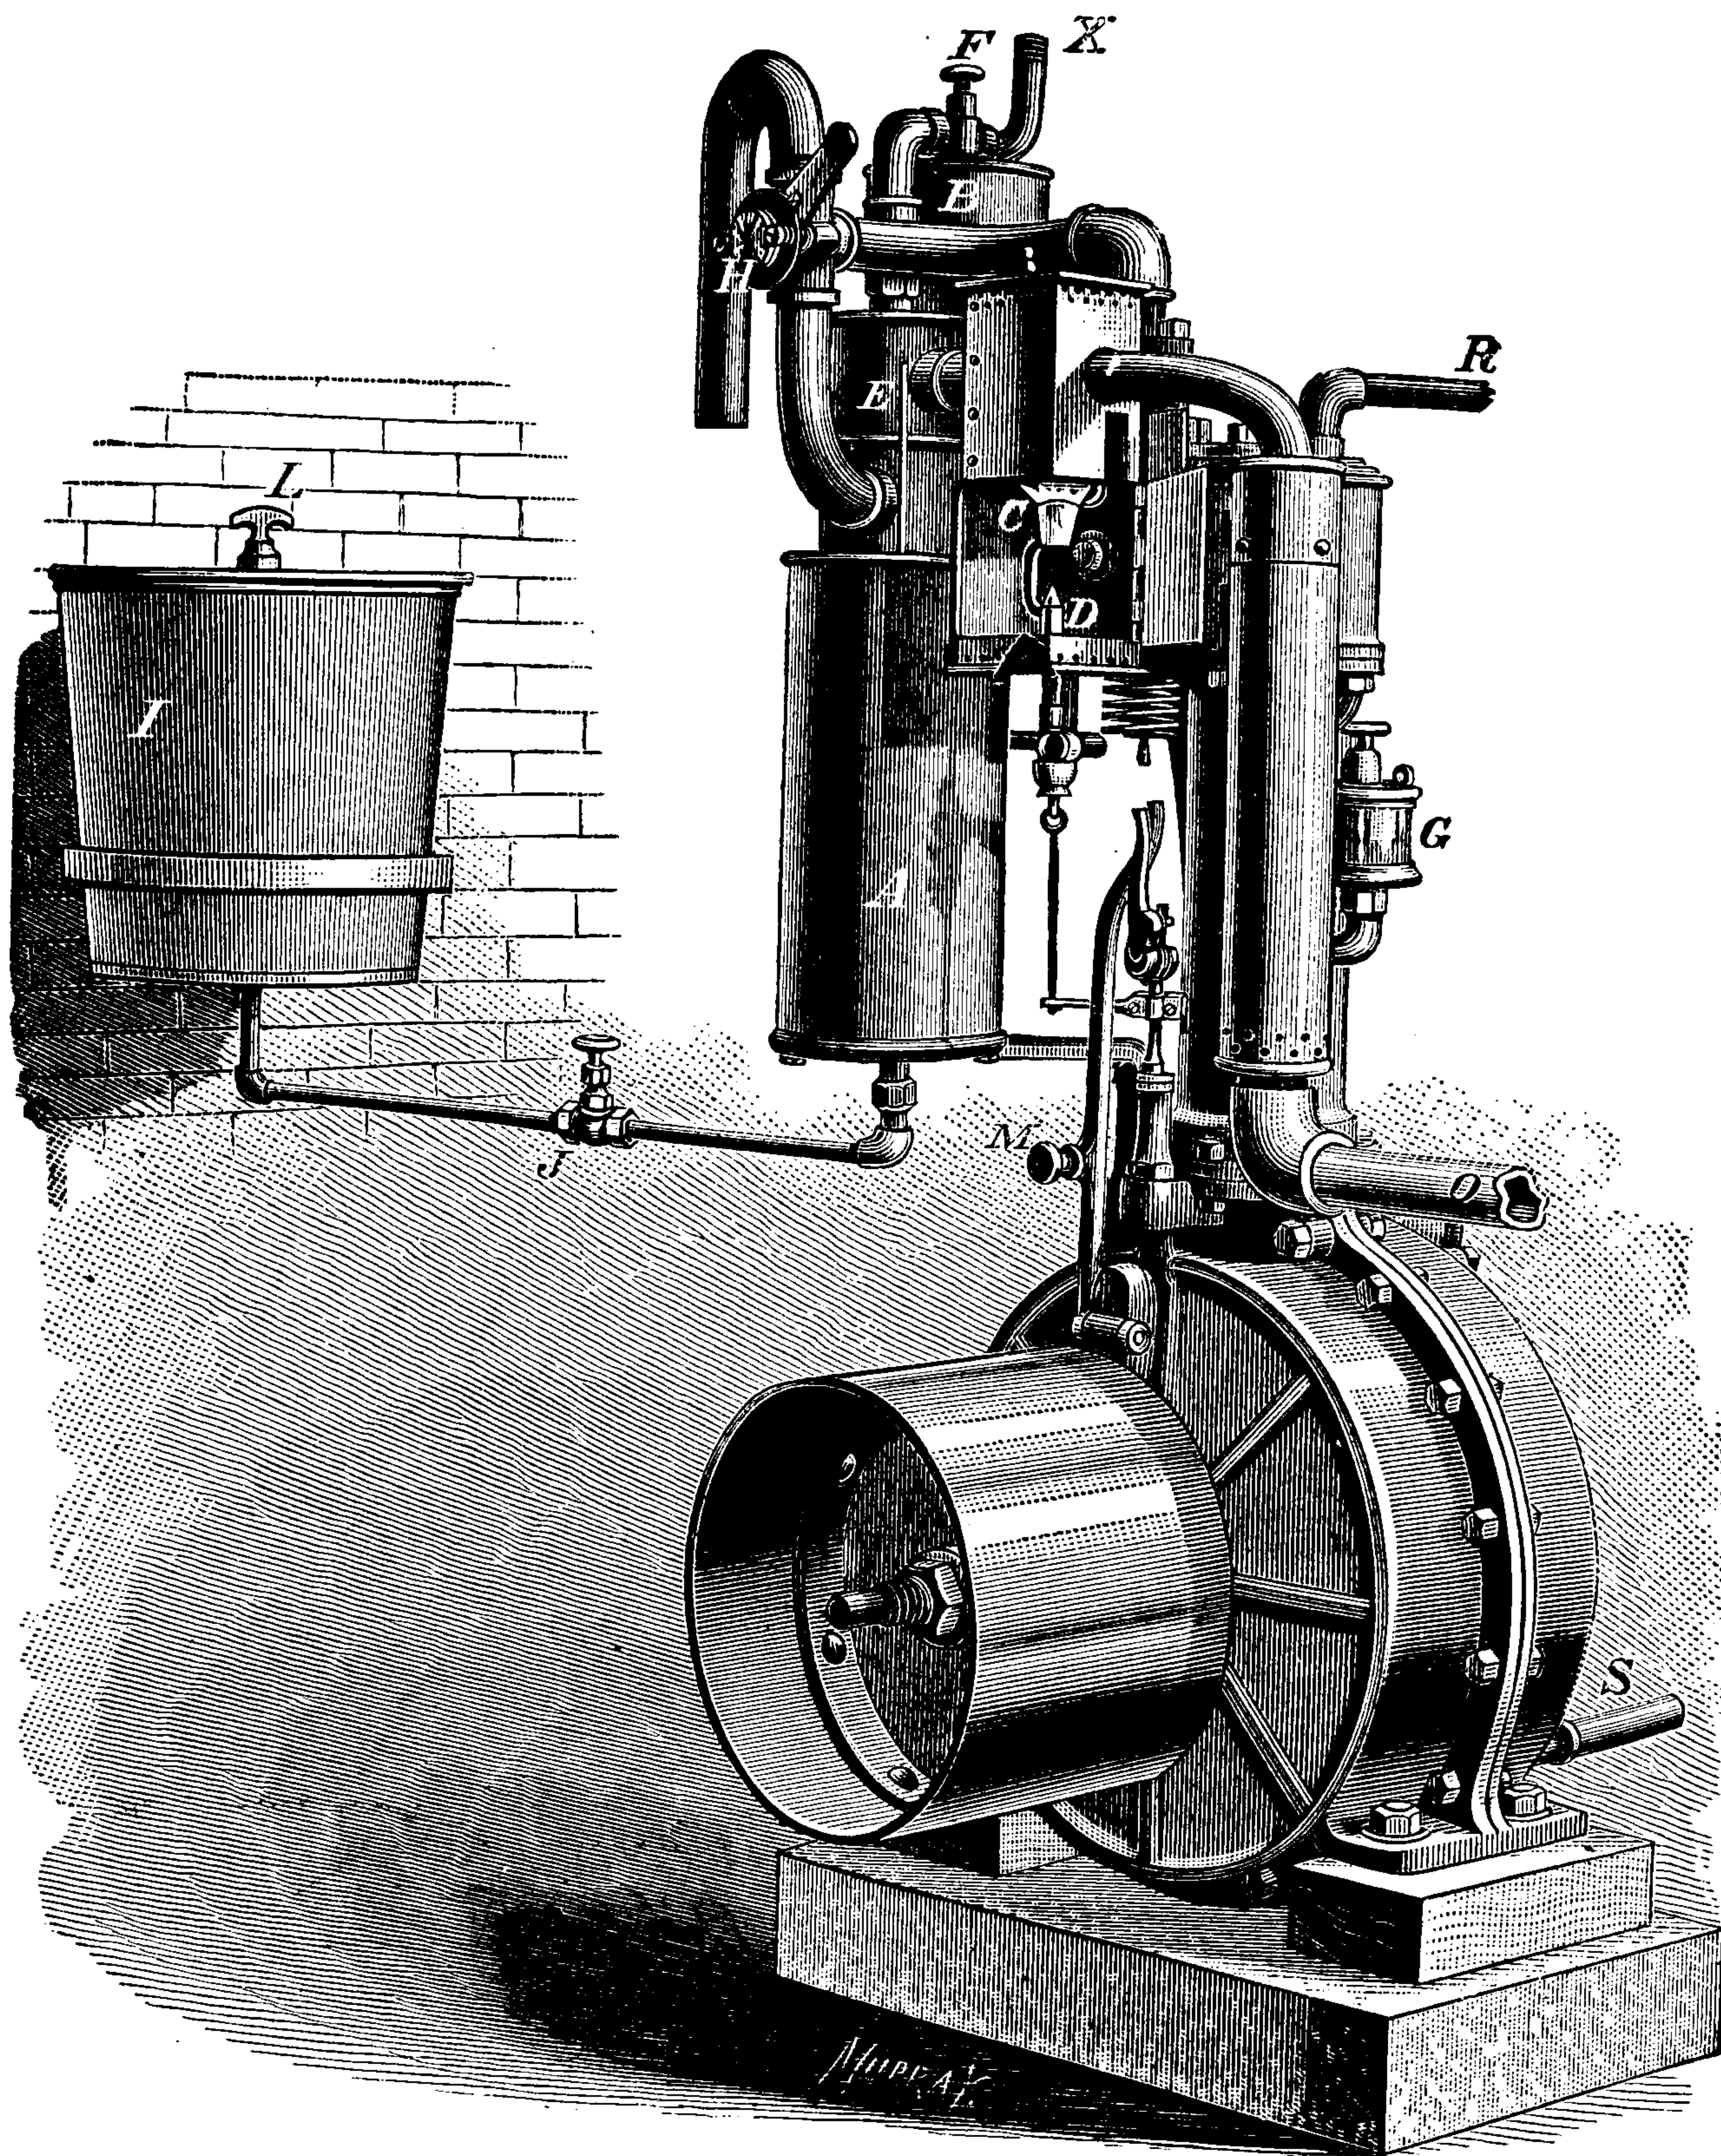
THE DAIMLER GASOLINE ENGINE, WITH CARBURETTER AND TANK-READY FOR RUNNING.
